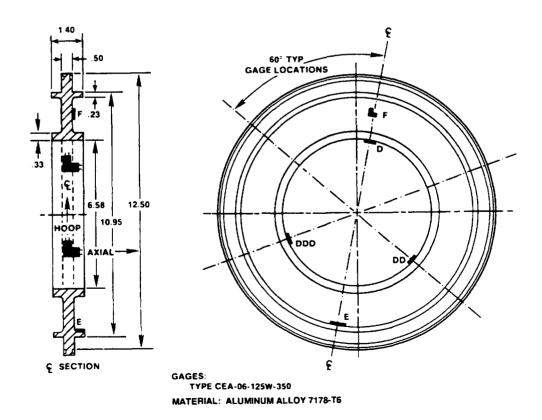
Aluminum ring stiffener DWG 0124007; location of gages.
